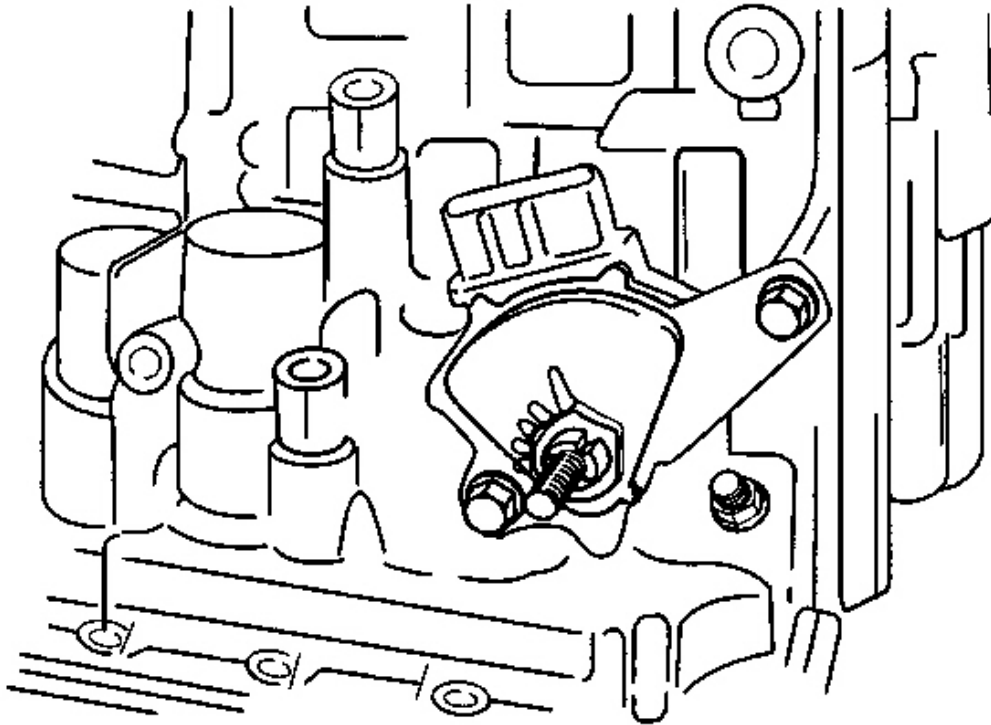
PNP Switch & Manual Valve Lever Shaft
